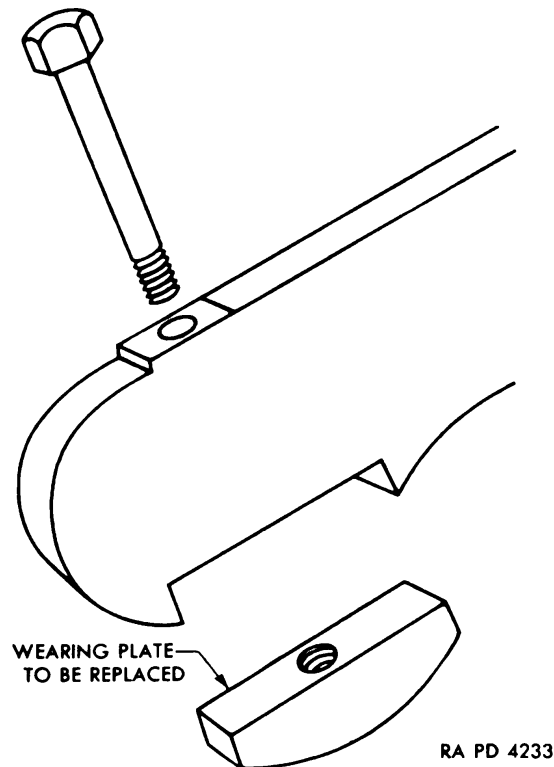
Bogie Wheel Lever and Upper Rubbing Plate
